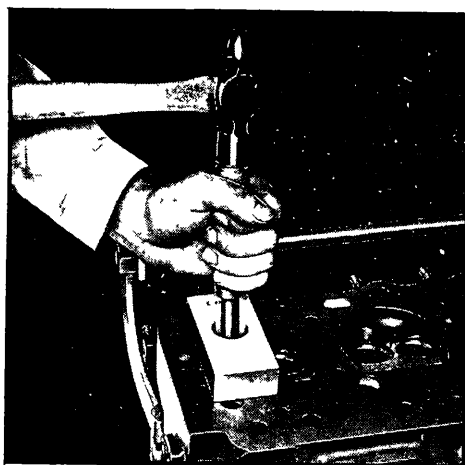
Sh wing special tool used to control position of valve guides when driven in place. 1951-52 V8 engine
